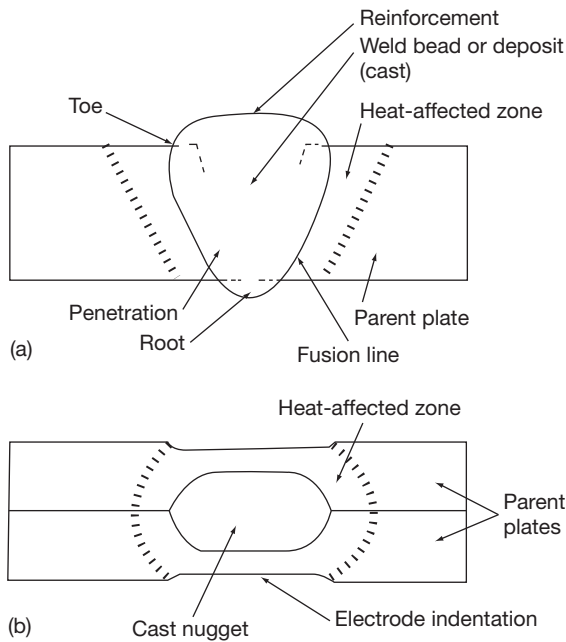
Weld definitions. (a) fusion weld and (b) resistance spot weld.
